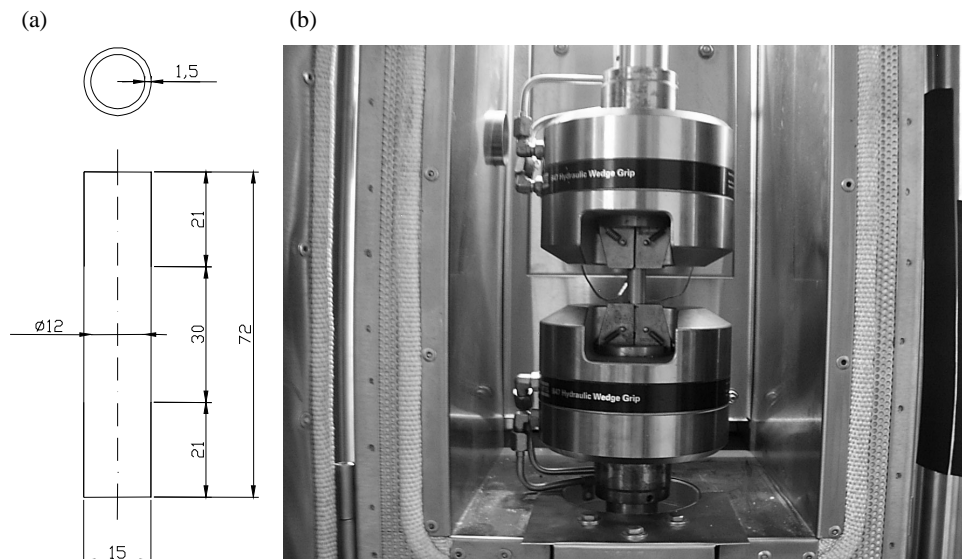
(a) A SMA specimen for the fatigue test and (b) the testing environments: grips and thermal chamber.
